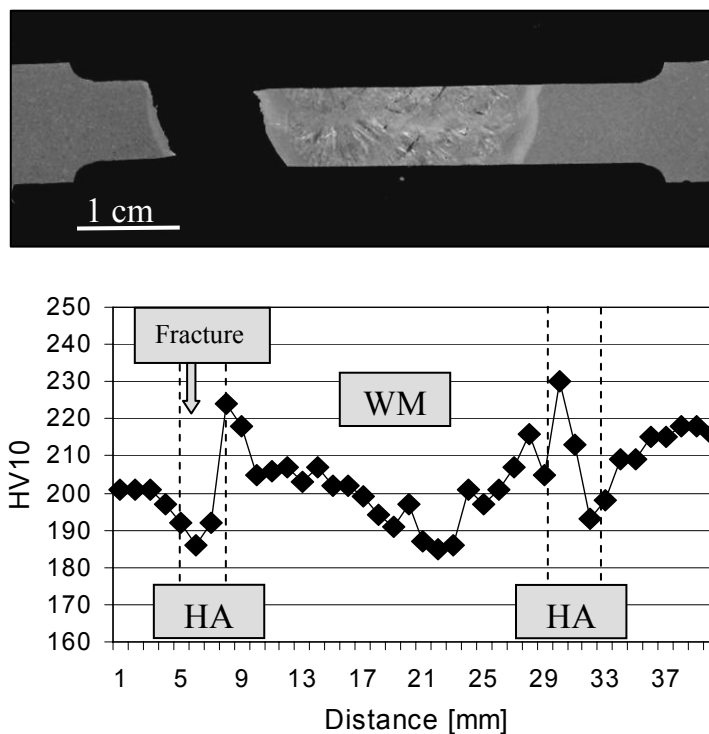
Macrograph and cross-weld hardness profile of the tube weld after the creep test 625°C / 50 MPa / 29 996 hrs.
